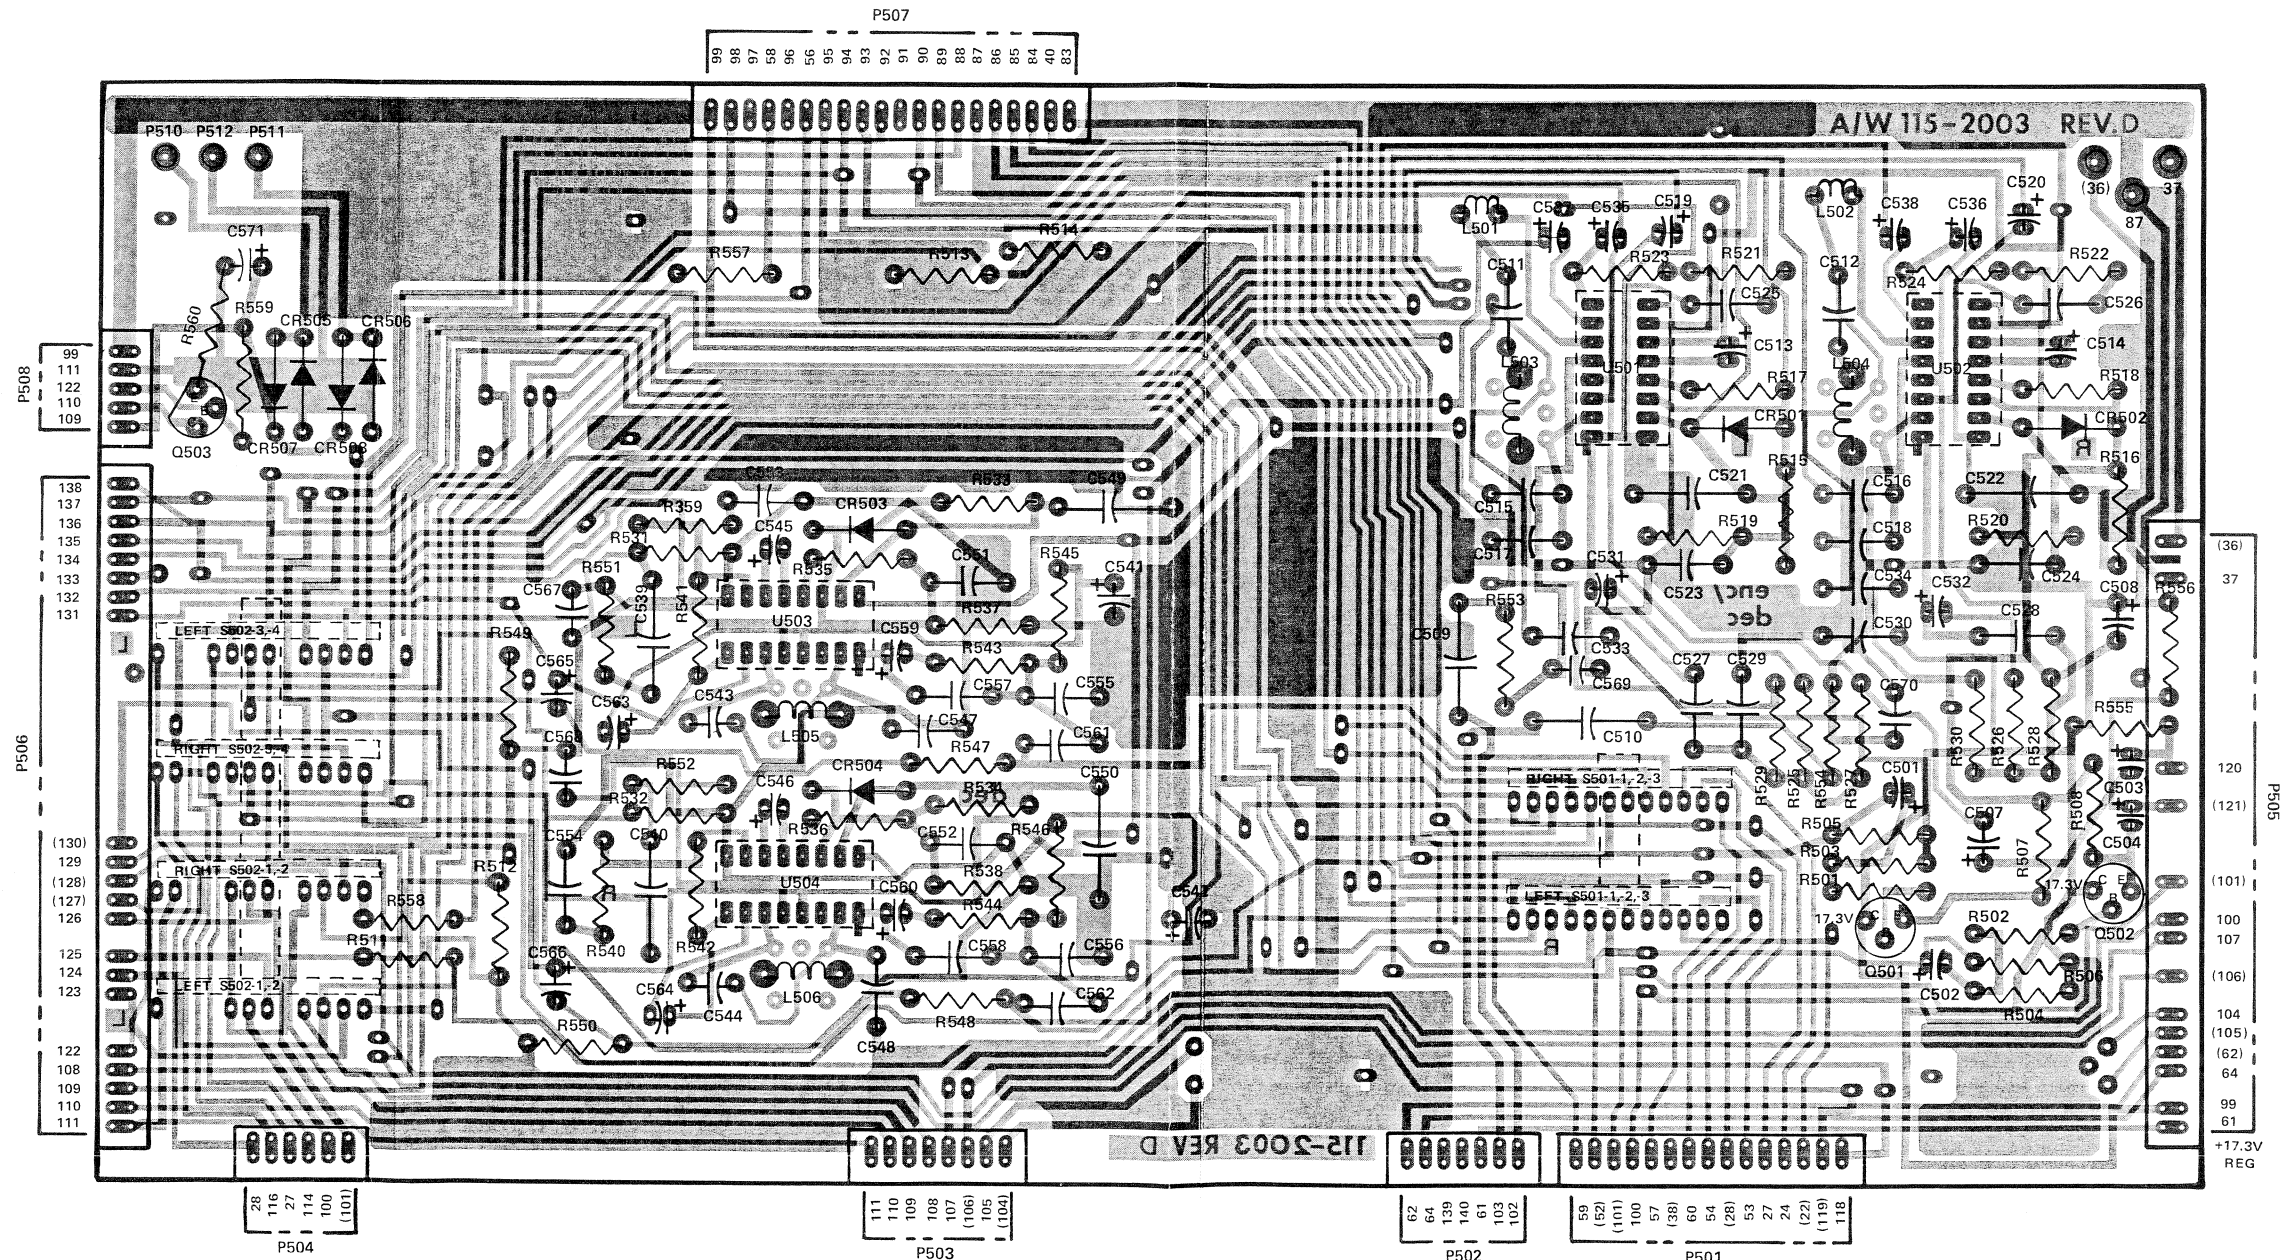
Dolby - Tape Monitor Board, Circuit Side
